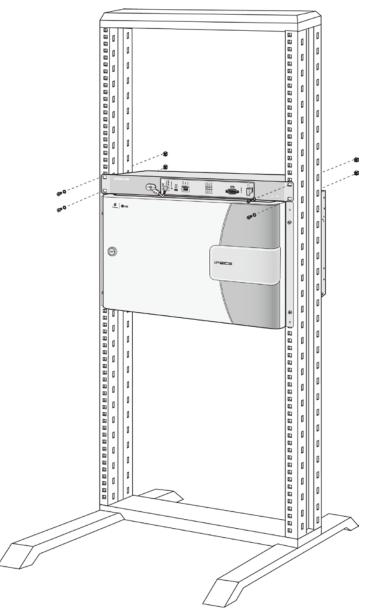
1U-RMB Rack-mount Installation
